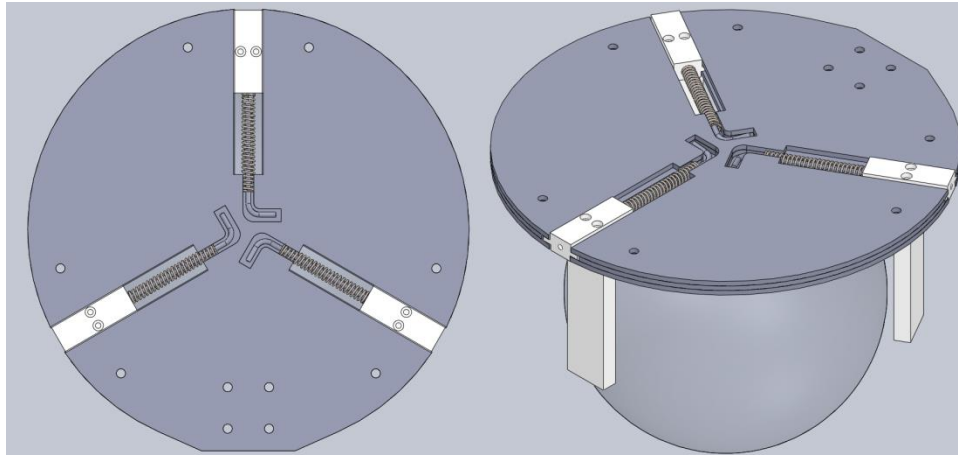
Final design of the head control mechanism. Note: the sphere recommends the approximate geometry of a helmeted headform
